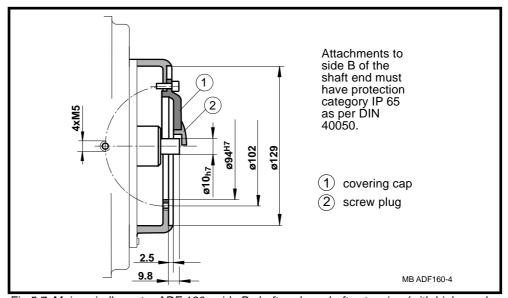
Main spindle motor ADF 160 - side B shaft end or shaft extension (with high-resolution motor feedback type 3 only)
